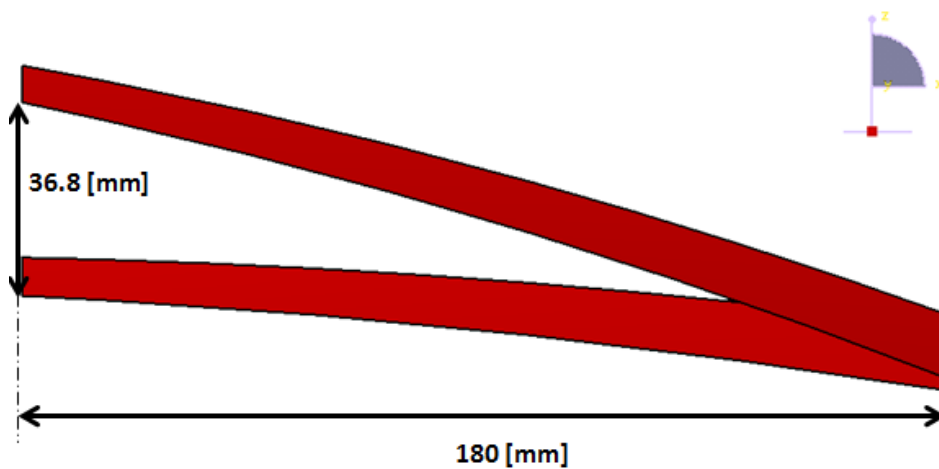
Dimensions of the Control Surface with Pre-Twist – Side View
